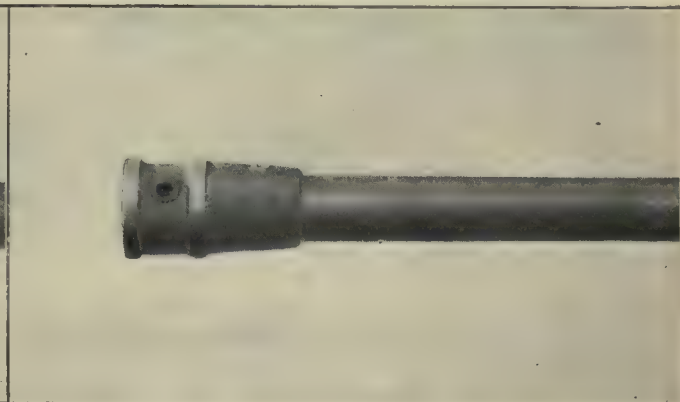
STEERING COLUMN AFTER WELDING
